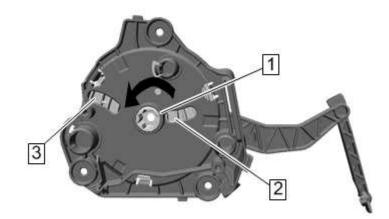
Mode Control Cam Channel Courtesy of GENERAL MOTORS COMPANY
